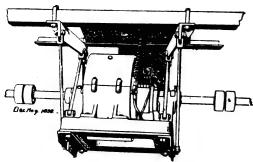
Method of Driving Line Shapting with Separate Motors.
